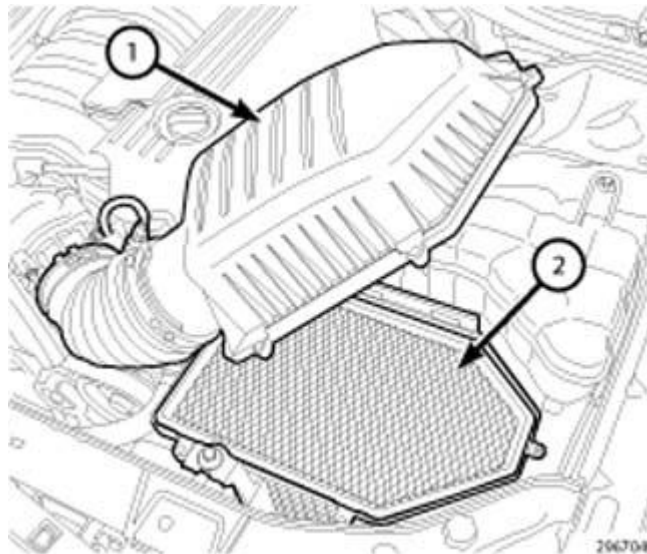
Air Cleaner Housing Cover & Air Cleaner Element
